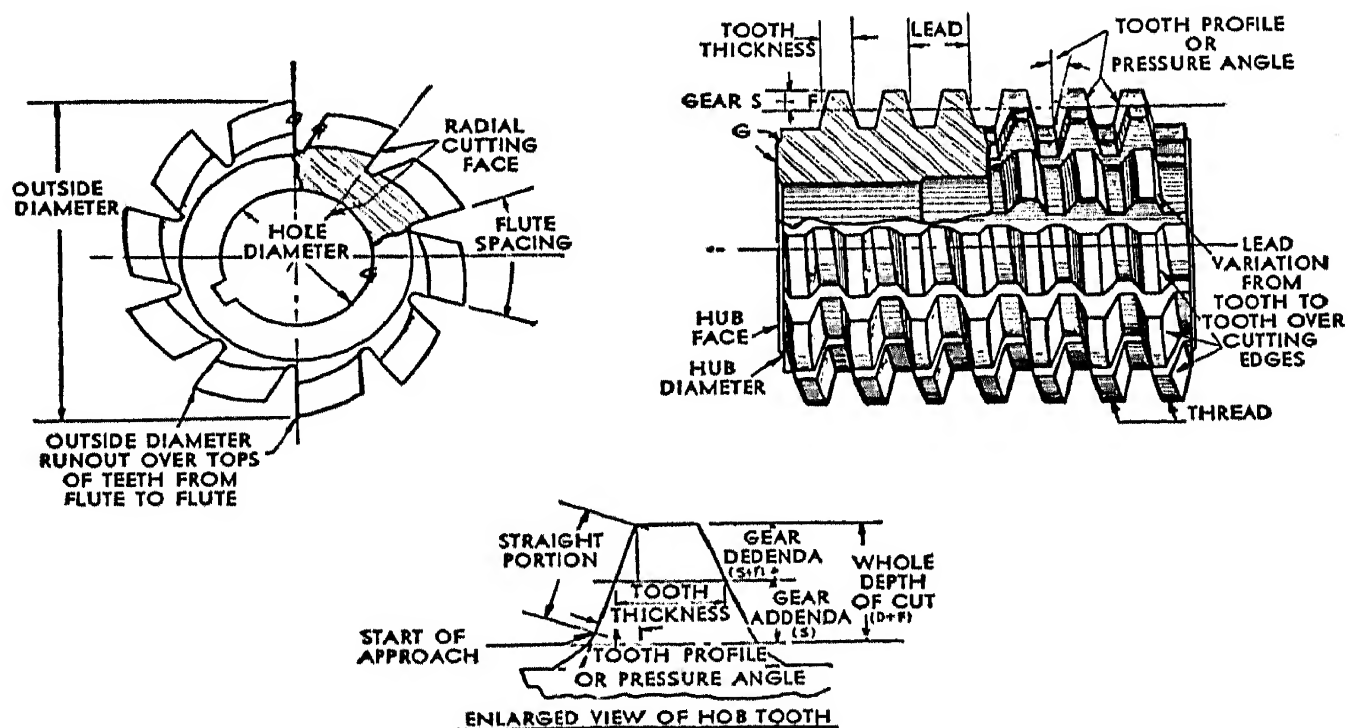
A hob and its elements. (Courtesy Illinois Tool Works Co.)
